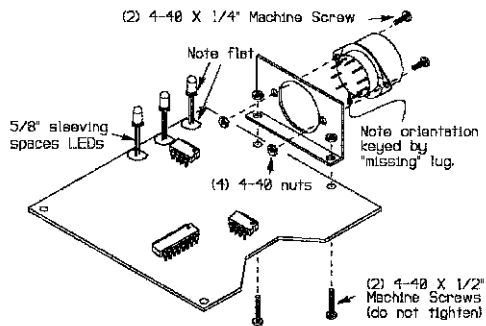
lengths of sleeving slipped over one of the leads properly spaces the LEDs to engage panel holes when the circuit board is installed in the case. The 1/2" long Screws which mount the tube bracket will mount the circuit board in the case in later steps.
